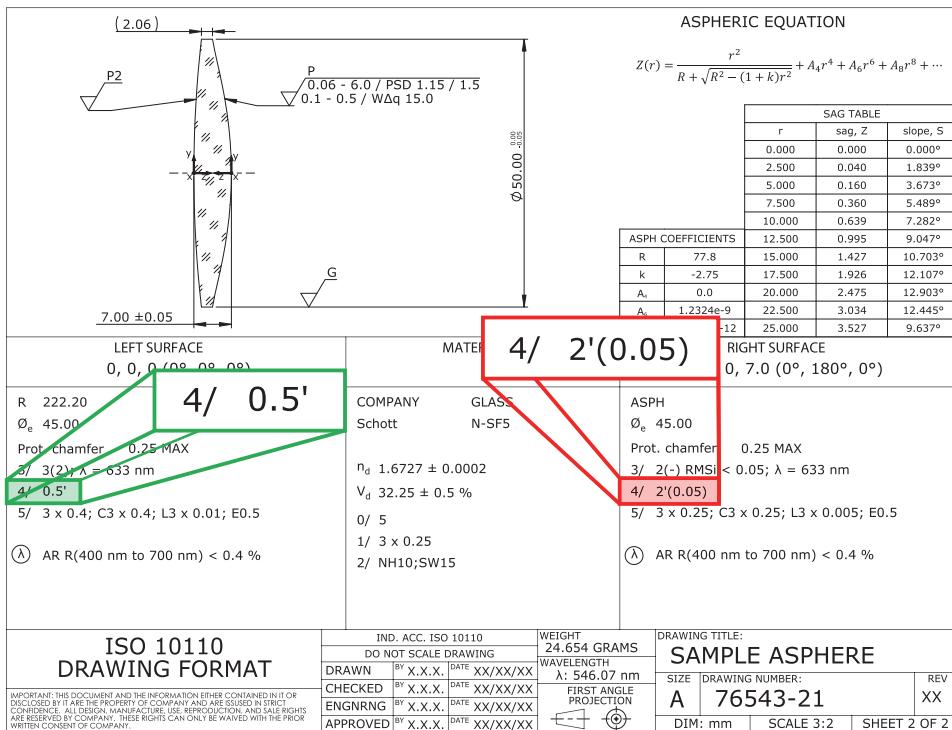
Example of aspheric optical element ISO 10110 drawing, highlighting centering tolerances.
